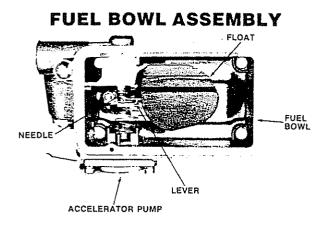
MODEL 2300 FUEL BOWL ASSEMBLY
